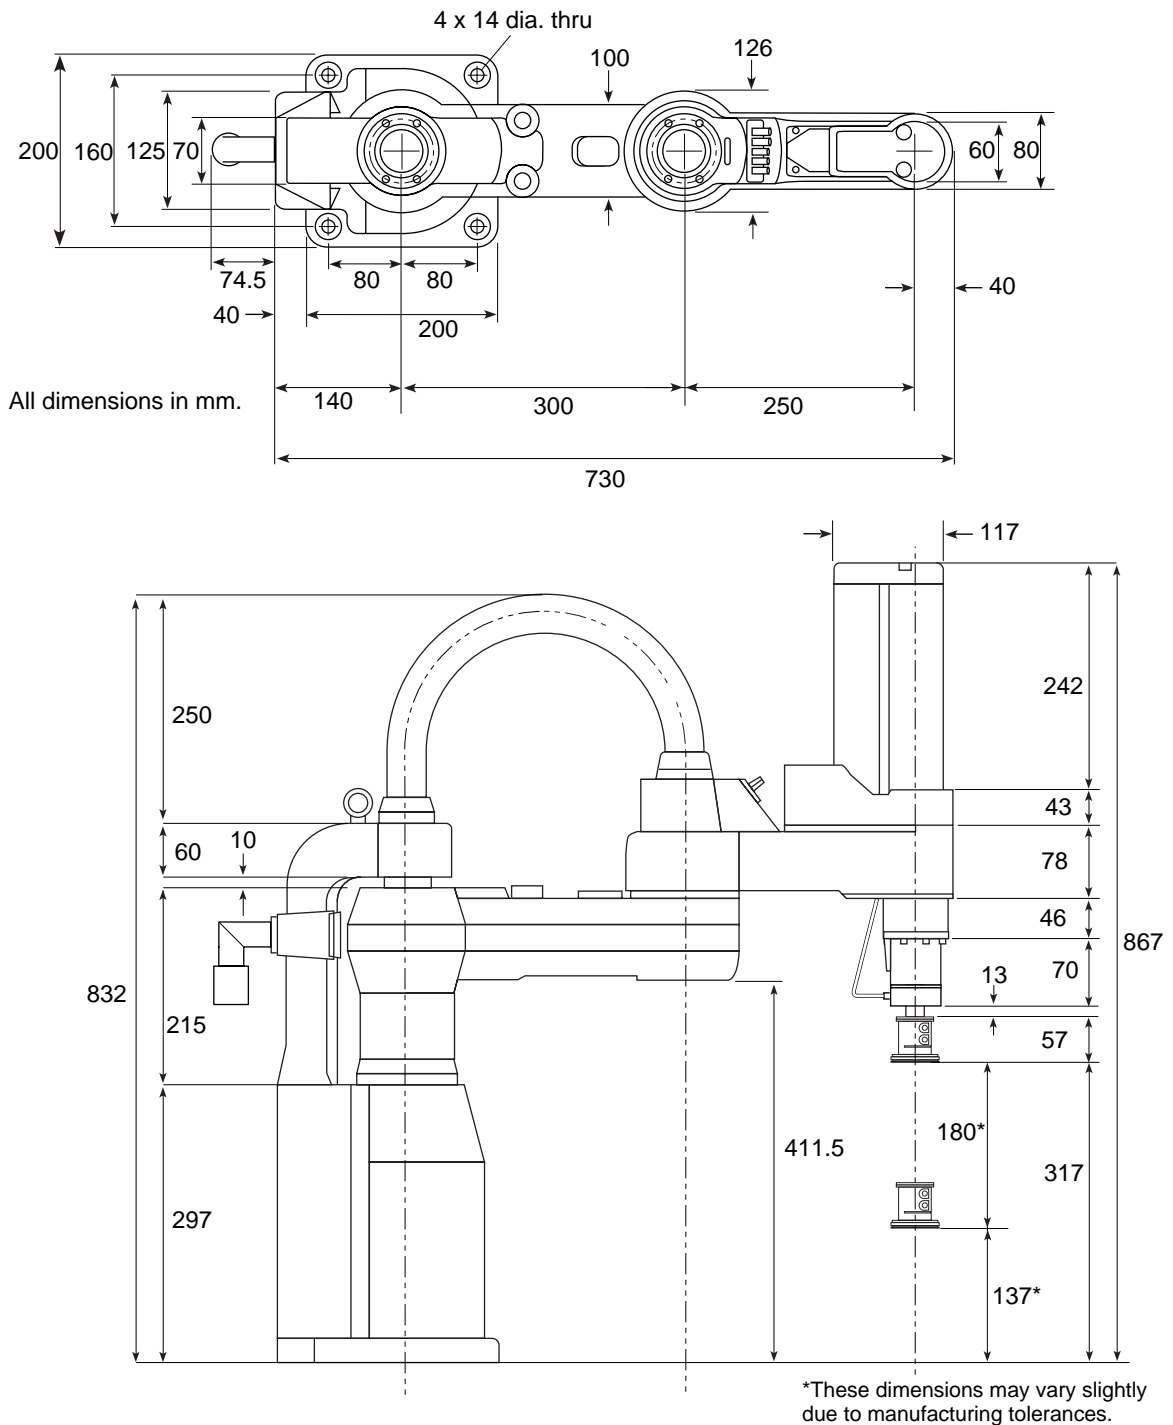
Adept 550 CleanRoom Robot Top and Side Dimensions
